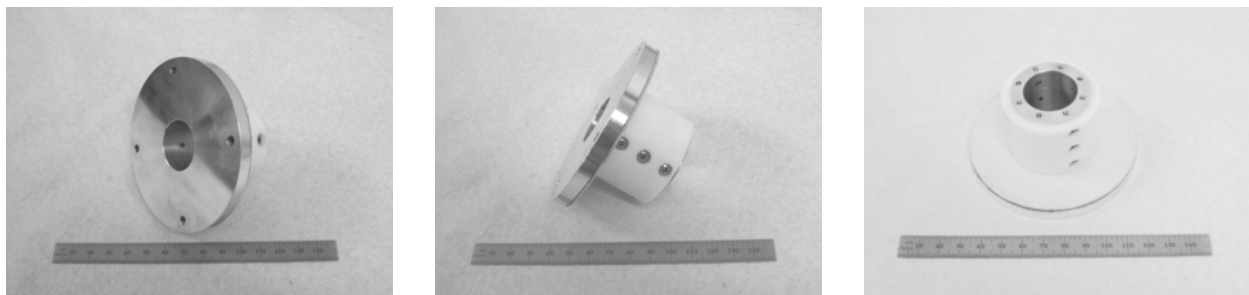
Drive disk. From left to right: top, side, and bottom views.
